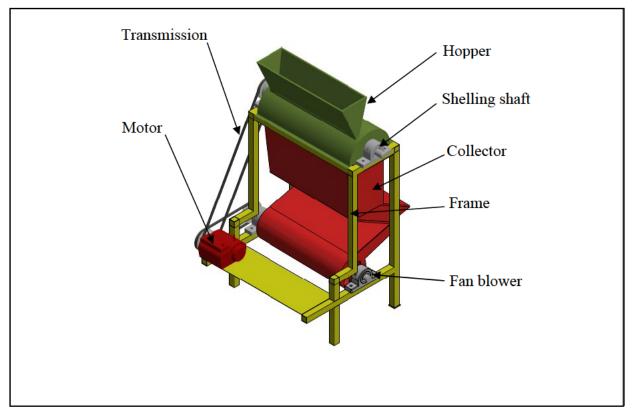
Concept drawing of a Bambara groundnuts shelling machine
